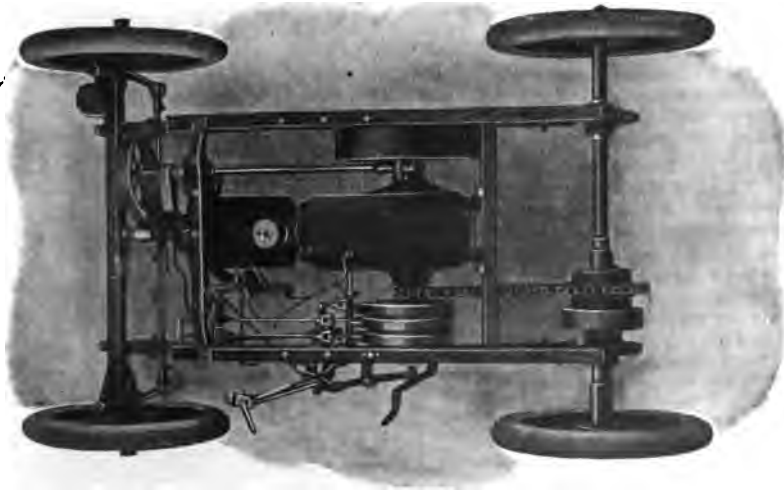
Knox Single-cylinder Four-wheeled Car, showing pin-cooled cylinder and great length of motor.
